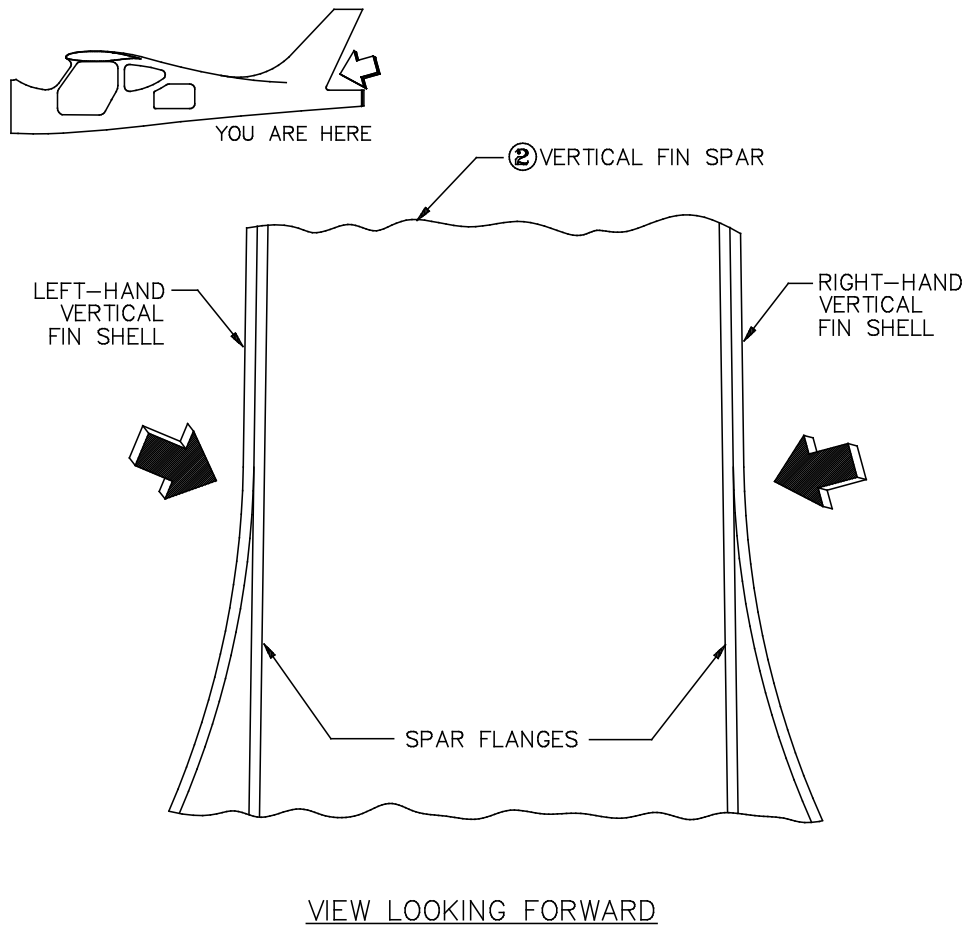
Marking and Drilling the Bottom Index Holes Through the Spar Flanges
